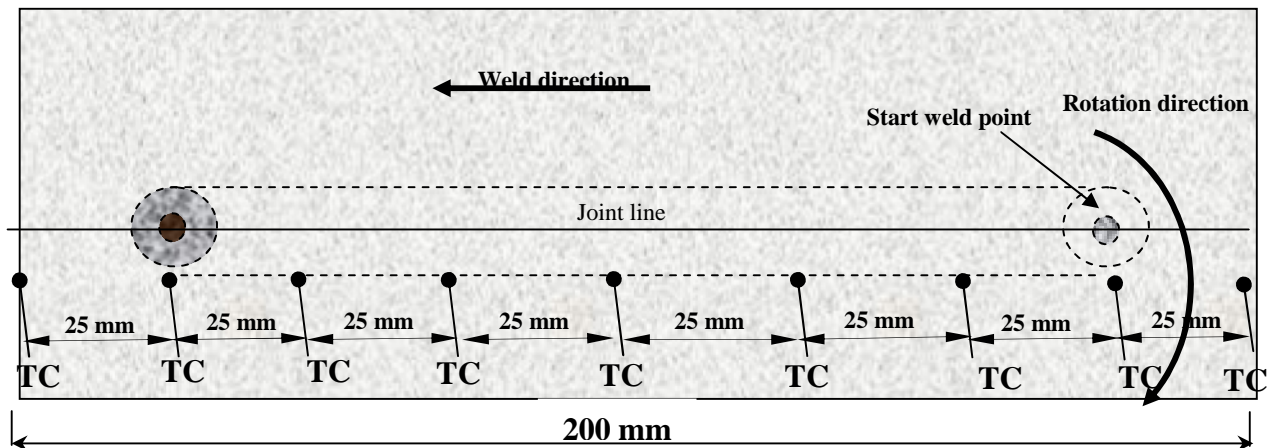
Layout of the thermocouples on the workpiece surface.
